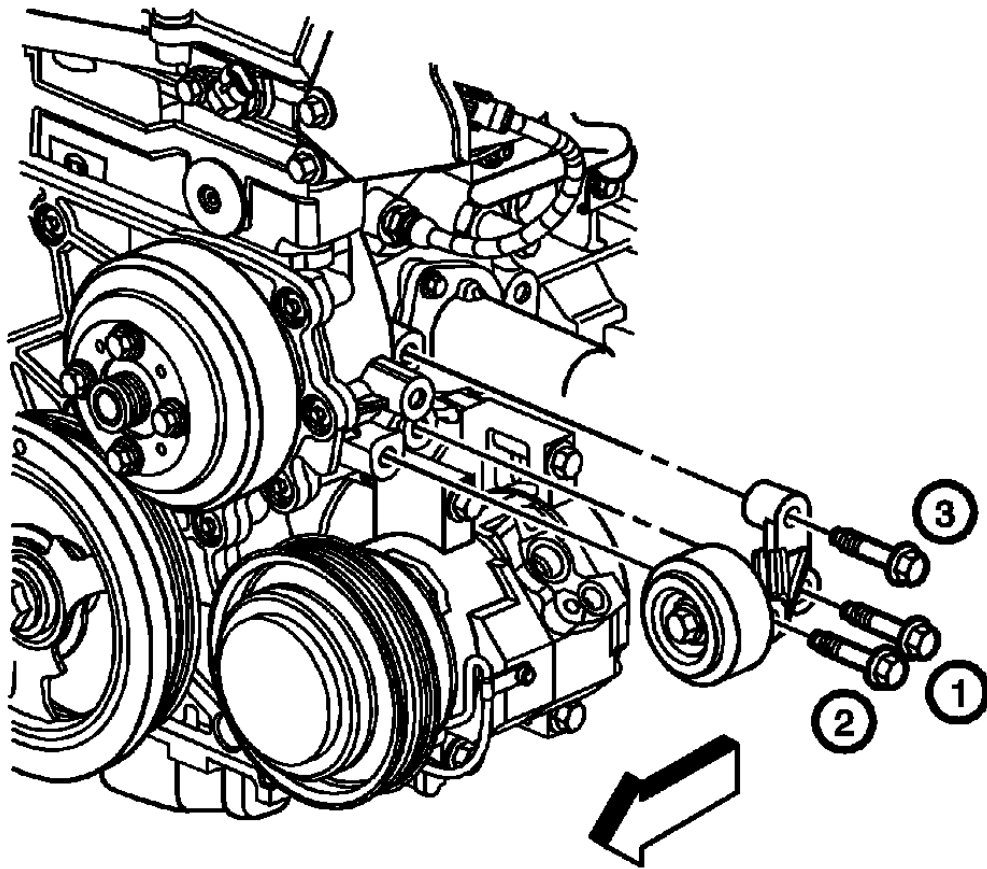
View Of Drive Belt Idler Pulley & Bolts
